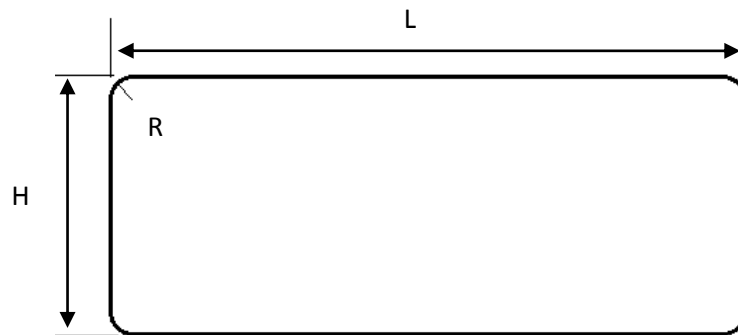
Geometry and nomenclature of reciprocating seal and mould cavity.
